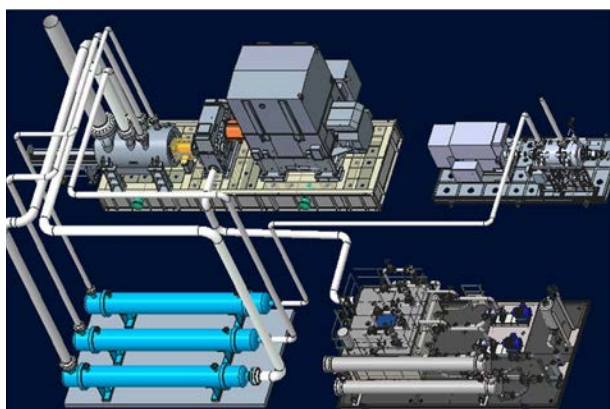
Layout drawing of Elliott CO2Phase compressor package with both compressor and pump.
